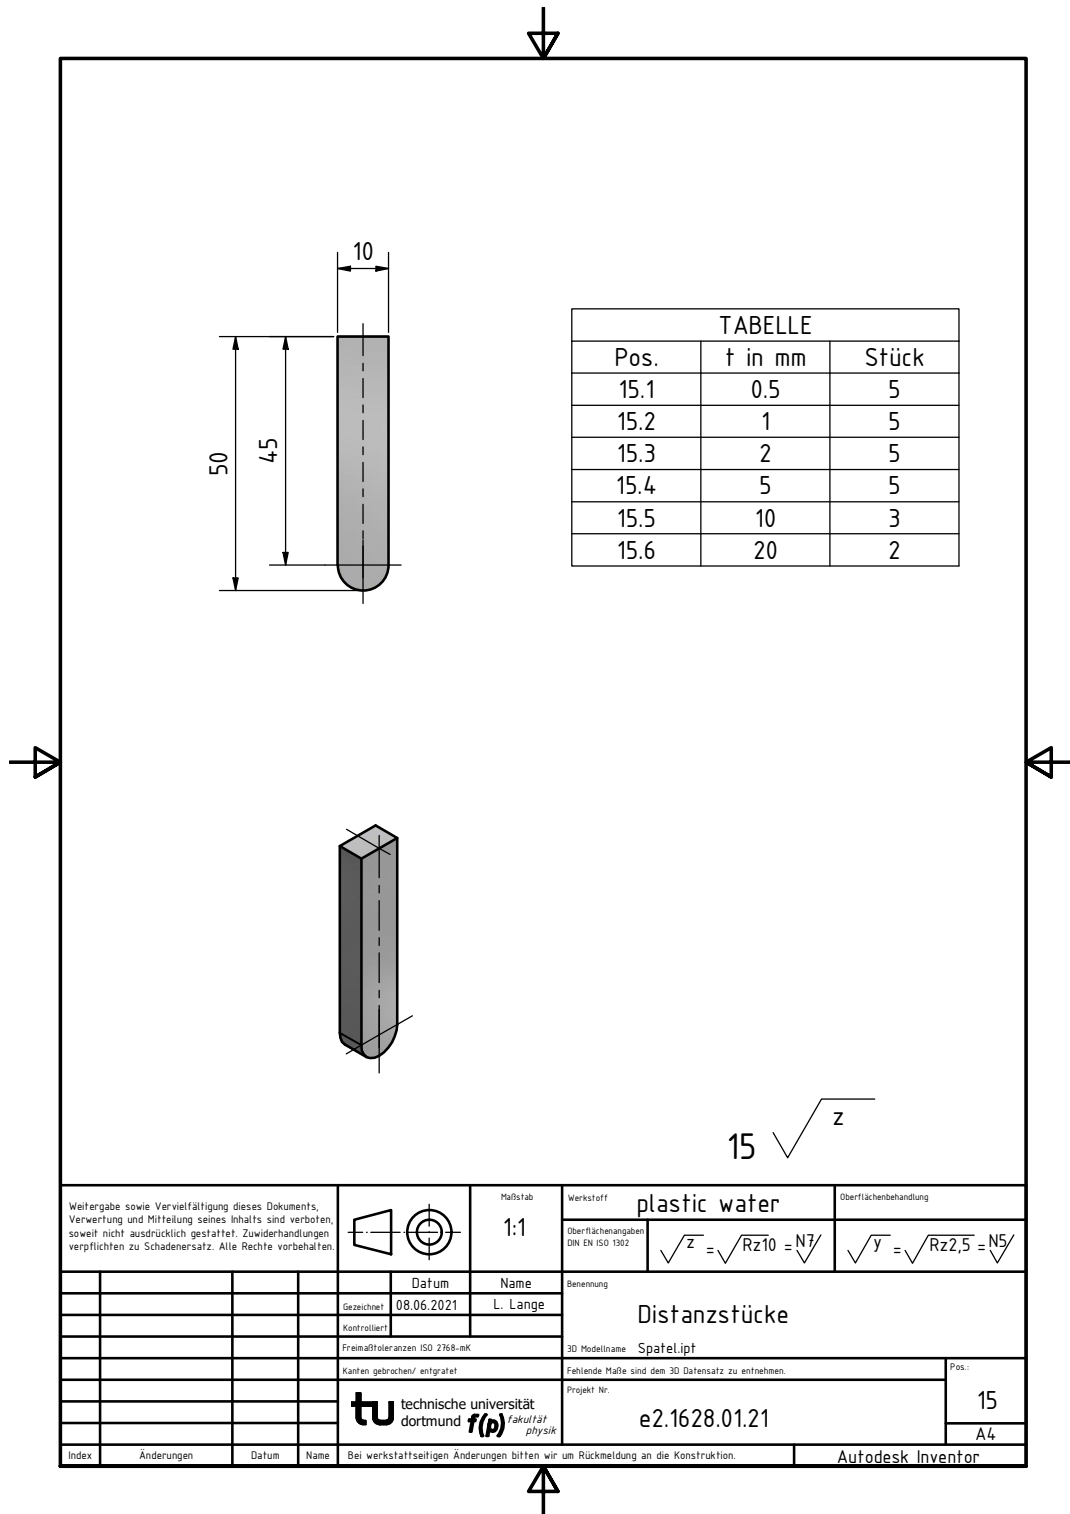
Construction Drawing: filling pieces for the chamber bracket.
